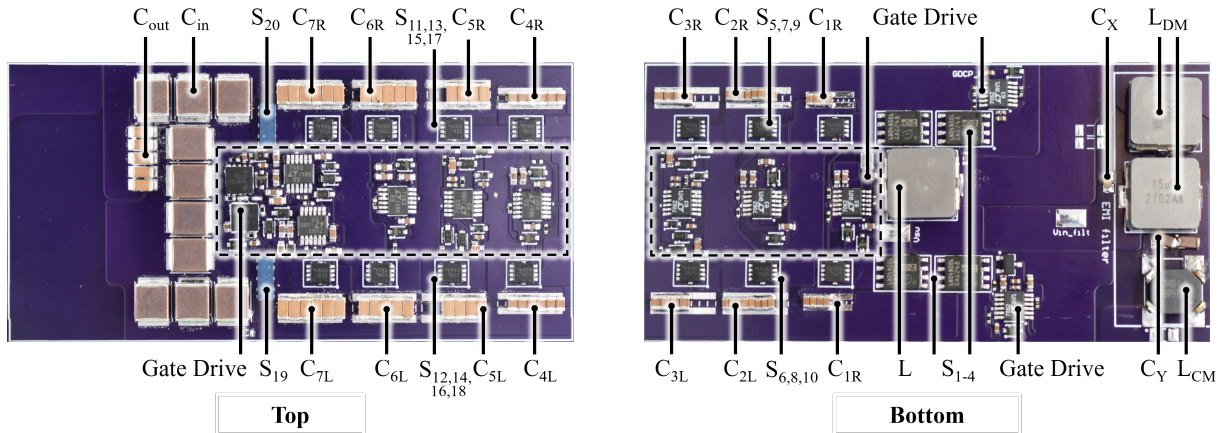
Image of top and bottom sides of prototype board with all components labeled.
